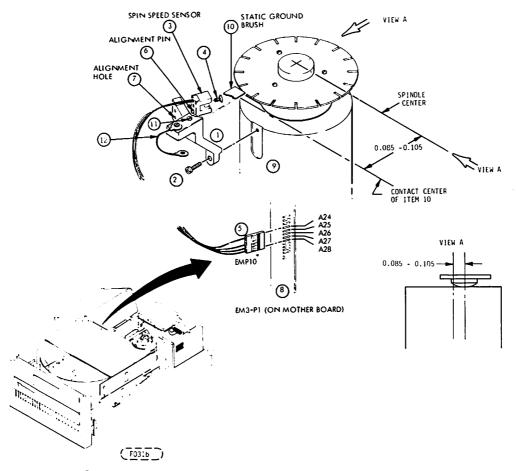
REMOVAL AND REPLACEMENT OF SPIN SPEED SENSOR ASSEMBLY
